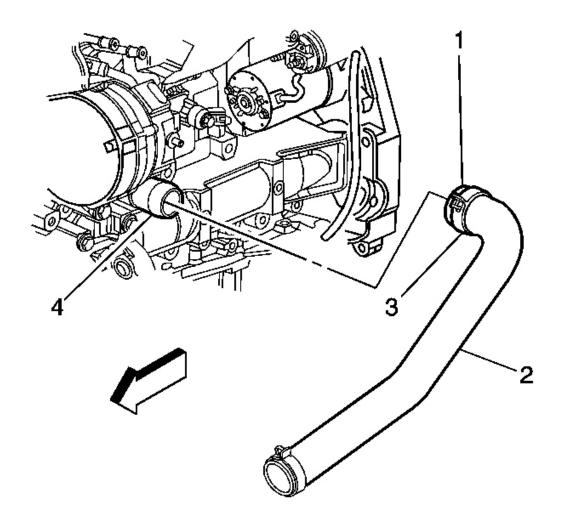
View Of Radiator Inlet Hose Courtesy of GENERAL MOTORS CORP.
